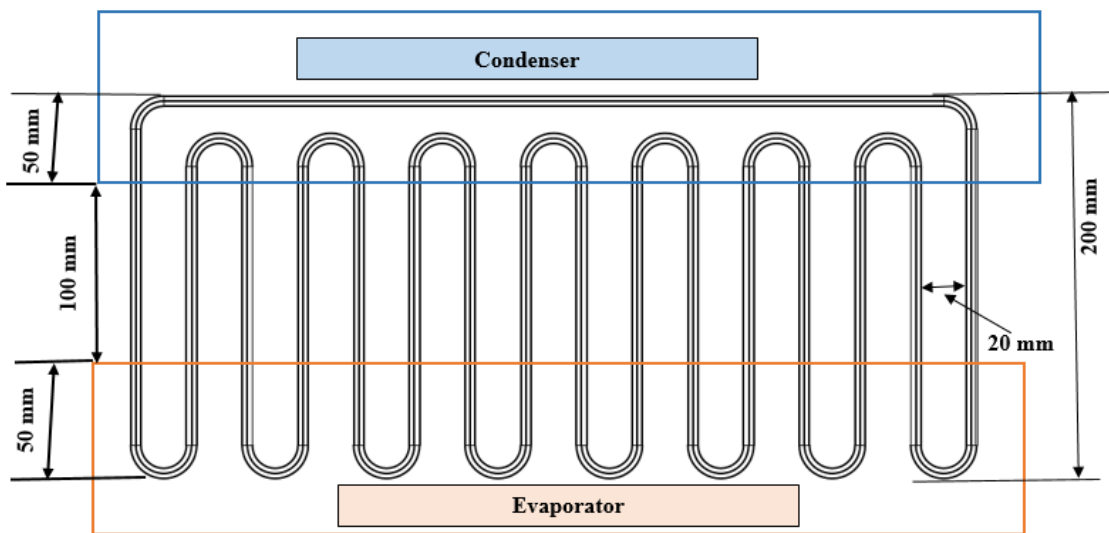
Schematic view of front cross-section with wire insert (WI) CLPHP
